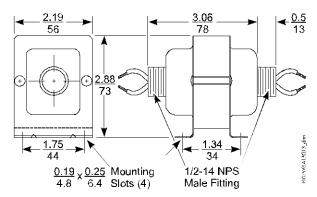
Dimensions for Y65A13 and Y65G13 Types, in./mm
